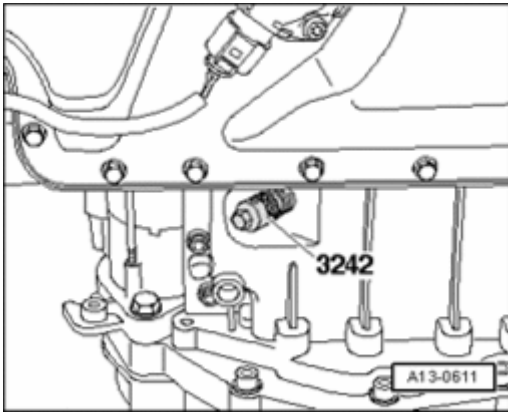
Removing/Installing Crankshaft Holder 3242 Into Hole
